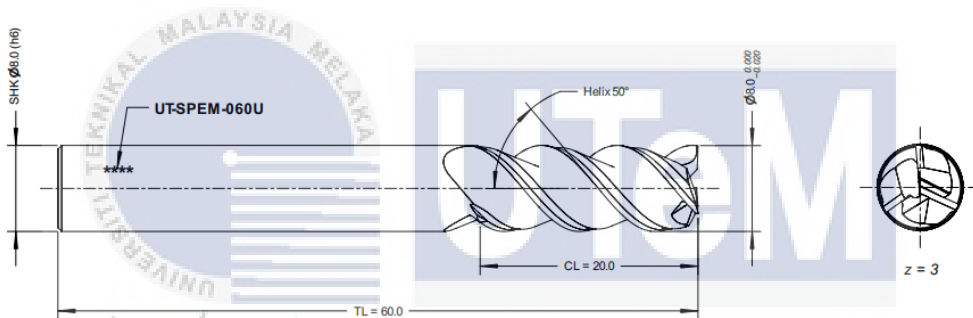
Drawing of end mill carbide with diameter 8mm, 3 flutes and helix angle 50°
